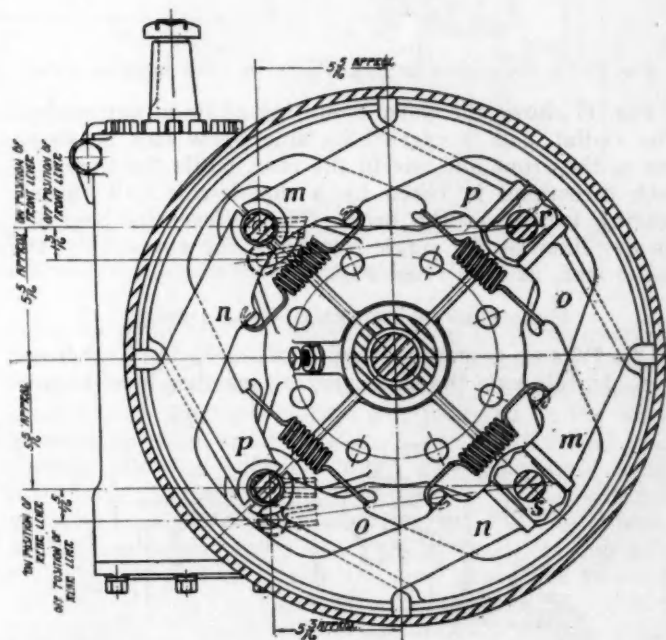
A SIDE VIEW OF THE BRAKE-DRUM USED WITH AXLE SHOWN IN FIG. 13 ILLUSTRATING THE ARRANGEMENT OF THE BRAKE-SHOES
